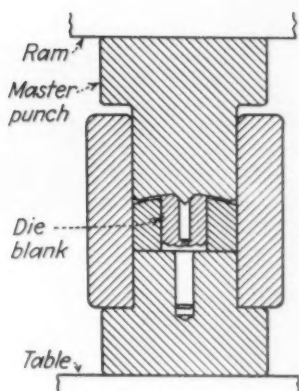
Operation of cold pressing countersinking punches and dies used in flush riveting operations.
